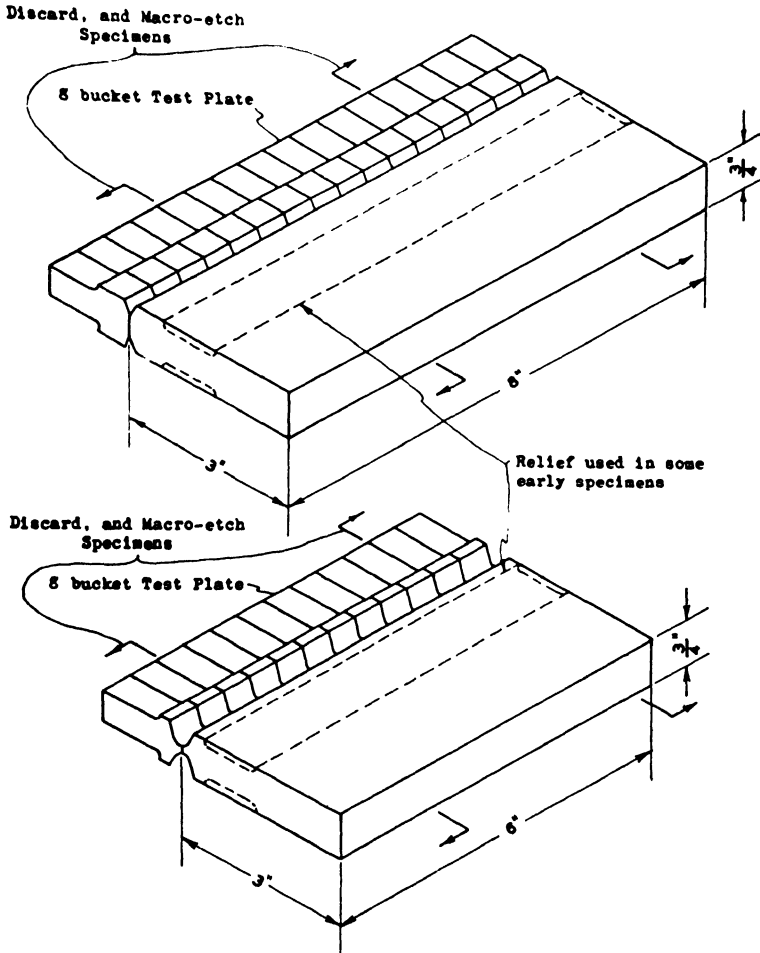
Wheel and bucket design weld test. (After Linnert)
